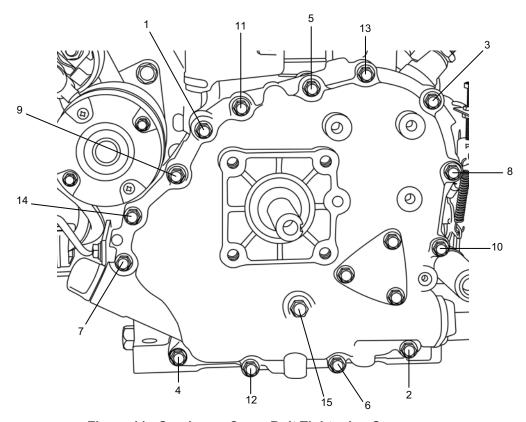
Crankcase Cover Bolt Tightening Sequence.
